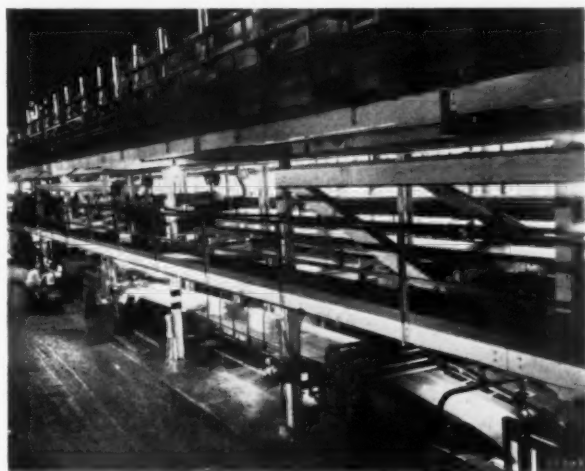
Receiving end equipment of the line is located on the floor level. Shown here are the shear, roller leveller, inspection table, and oiler.
